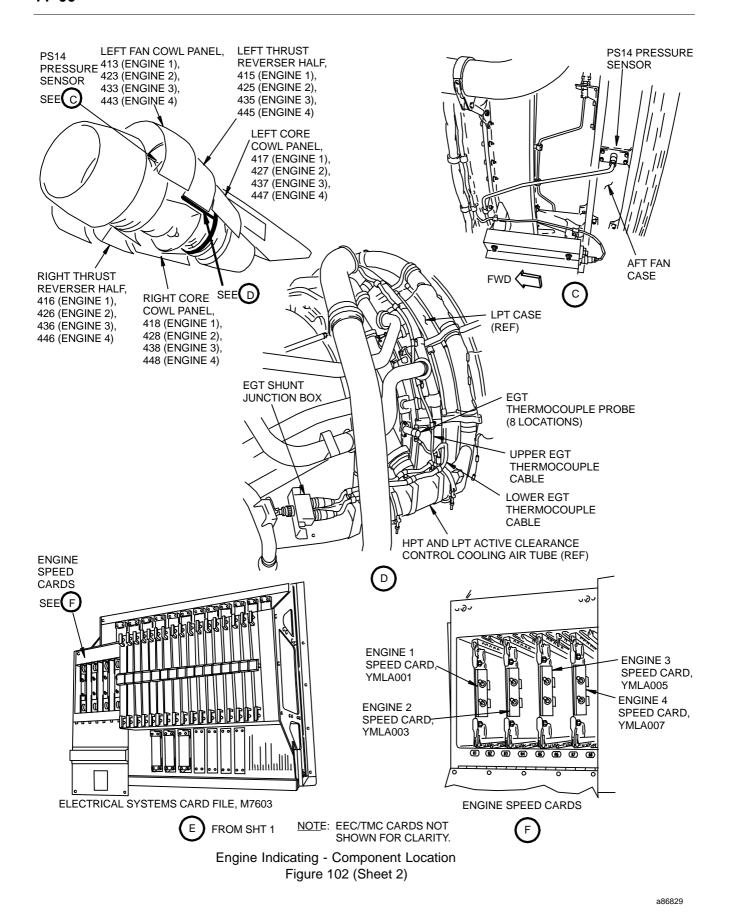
77-00 Engine Indication Component Location Fig. 102 (Sheet 2)
